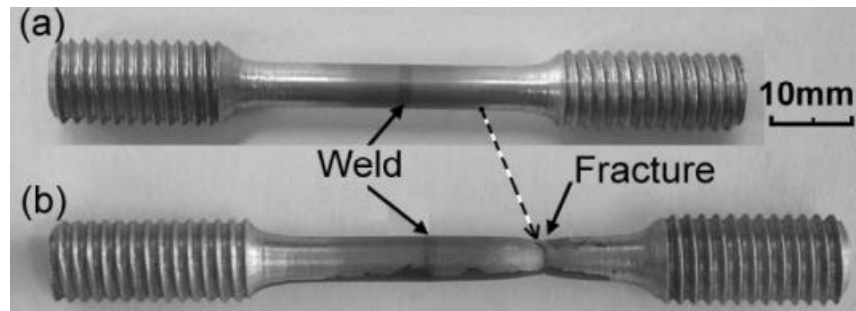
Photos of a tensile specimen before (a) and after (b) tensile test (slightly etched) [31]
